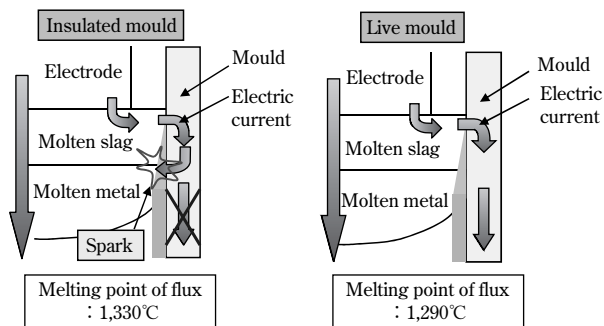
Pattern diagrams of insulated mould and live mould in ESR melting
